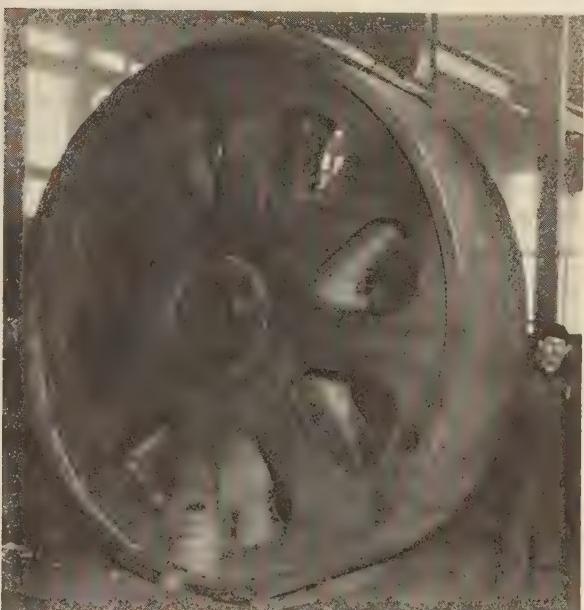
WELDED GEAR BLANK WITH HUBS OF FORGED STEEL, WEB MEMBERS OF 0.20 CARBON-STEEL PLATE, AND RIM OF 0.45 CARBON-STEEL PLATE
